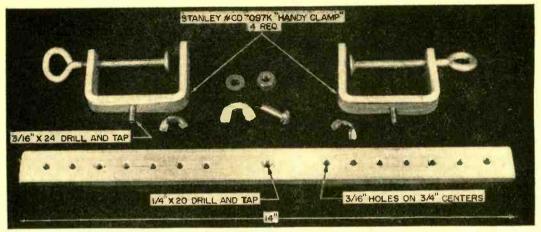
Basic layout for making a single rocker arm including all necessary parts.
